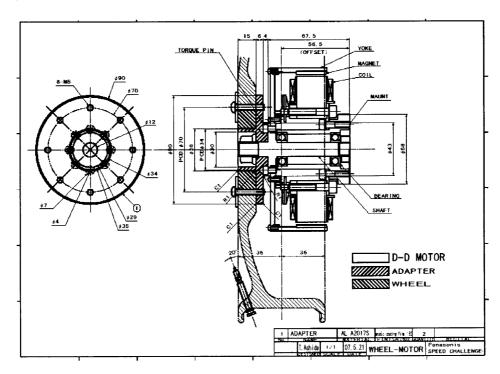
Construction drawing indicates the motor layout inside the wheel
